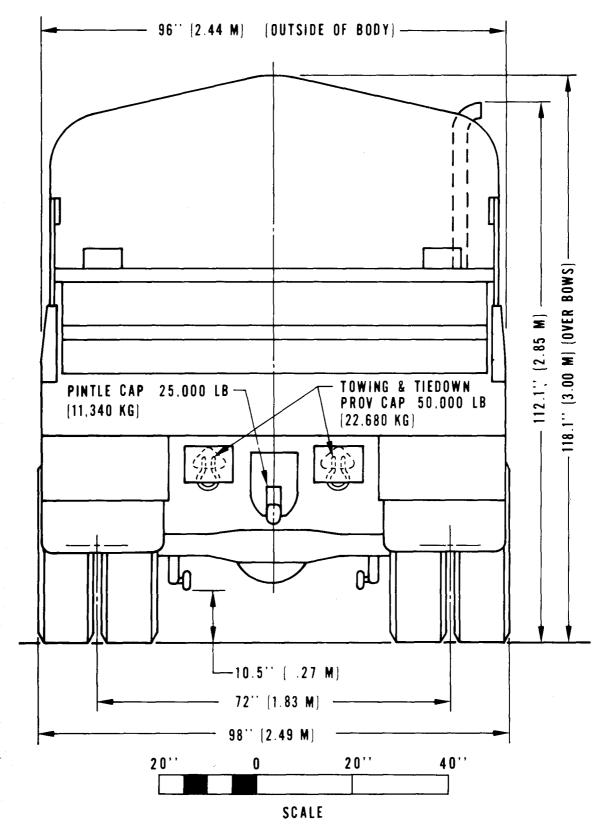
Rear elevation of truck, cargo, WWN and WOWN, M814.
